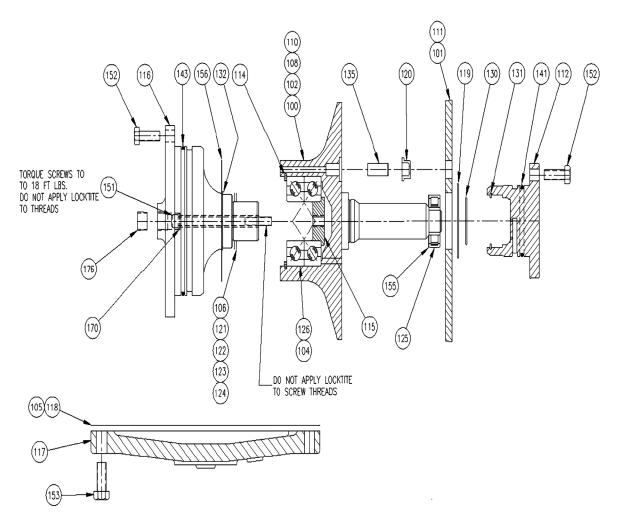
Gaterotor Removal (VSG 301-701 Models)
